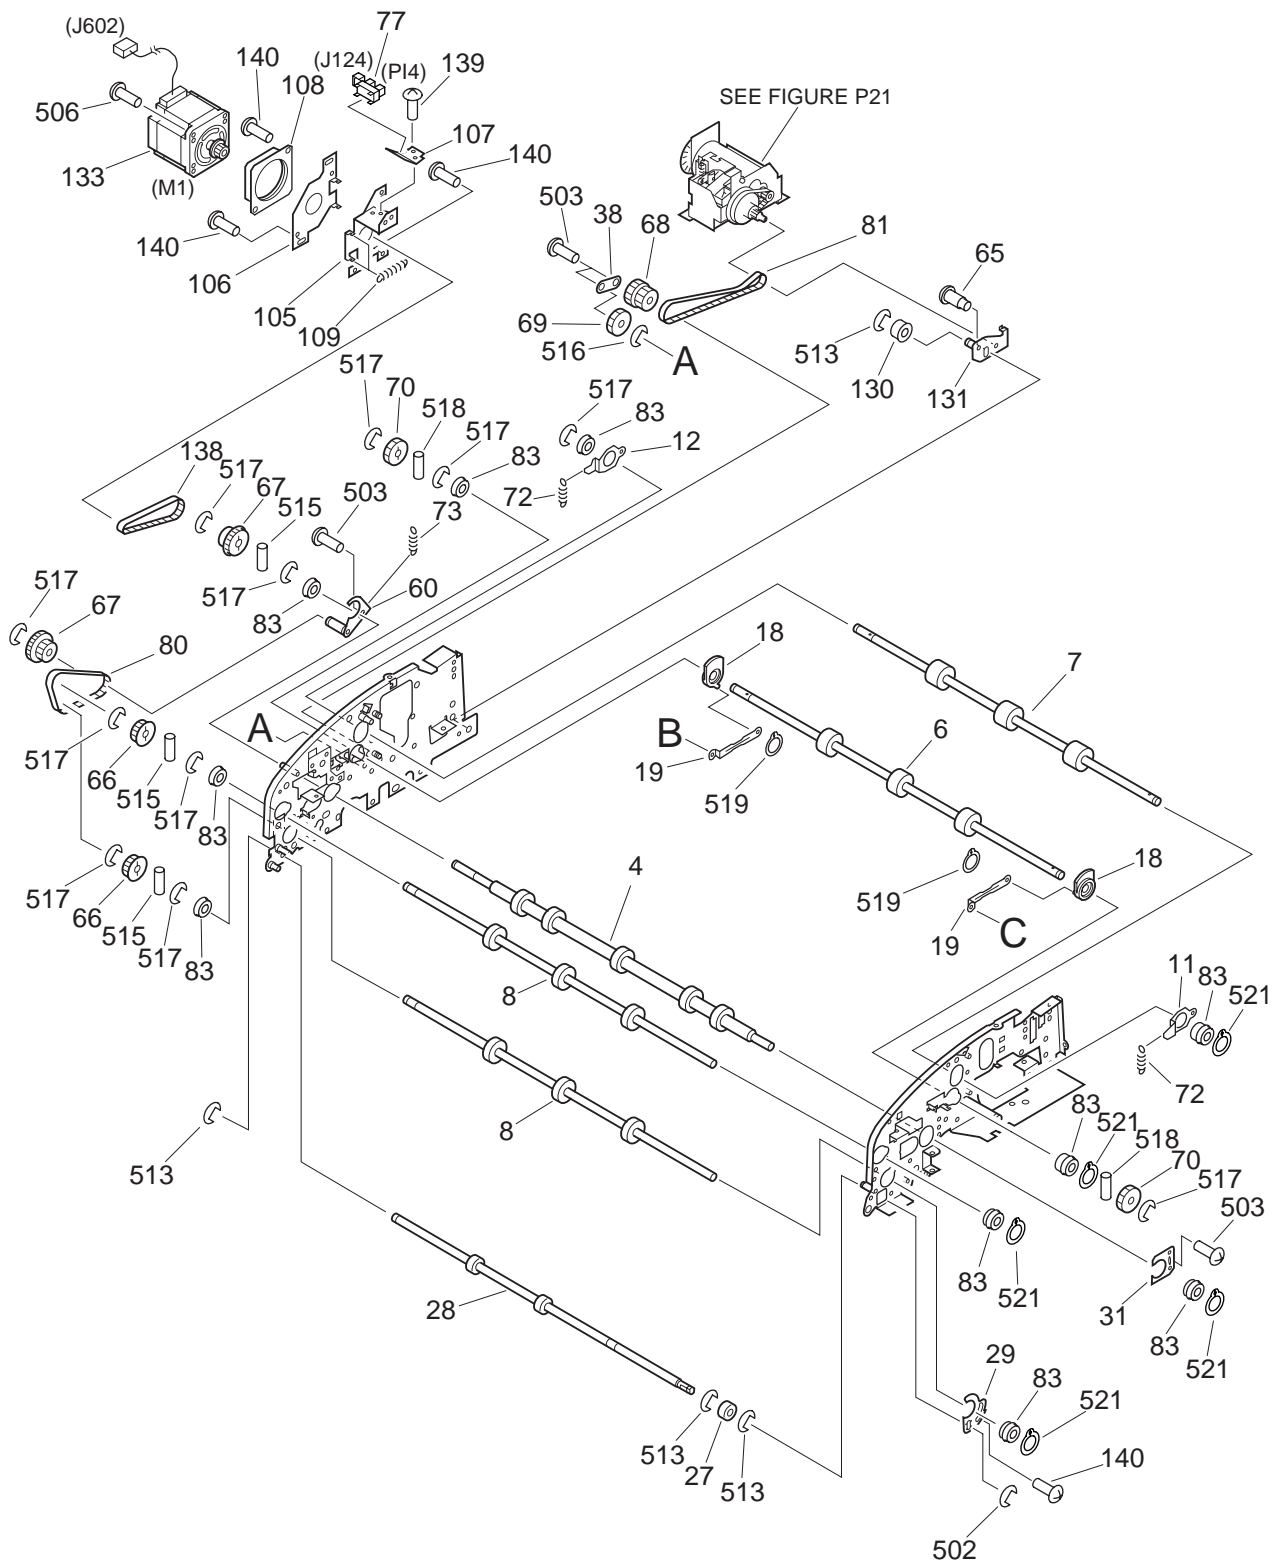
PAPER PICK-UP ASSEMBLY (1/4)
